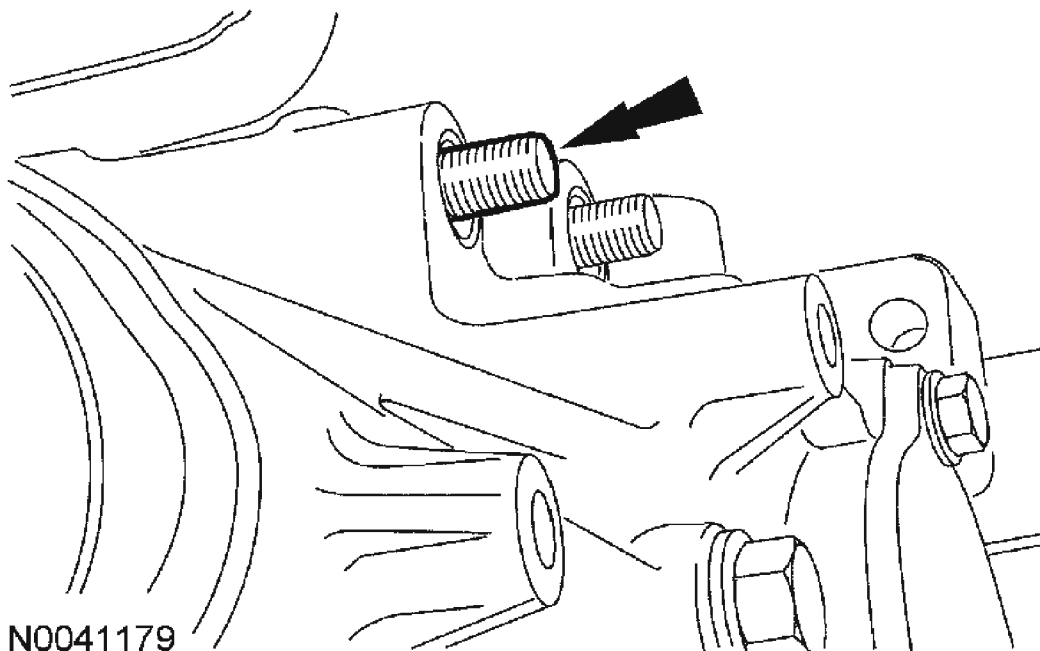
Removing Transfer Case-To-Transaxle Bolts
